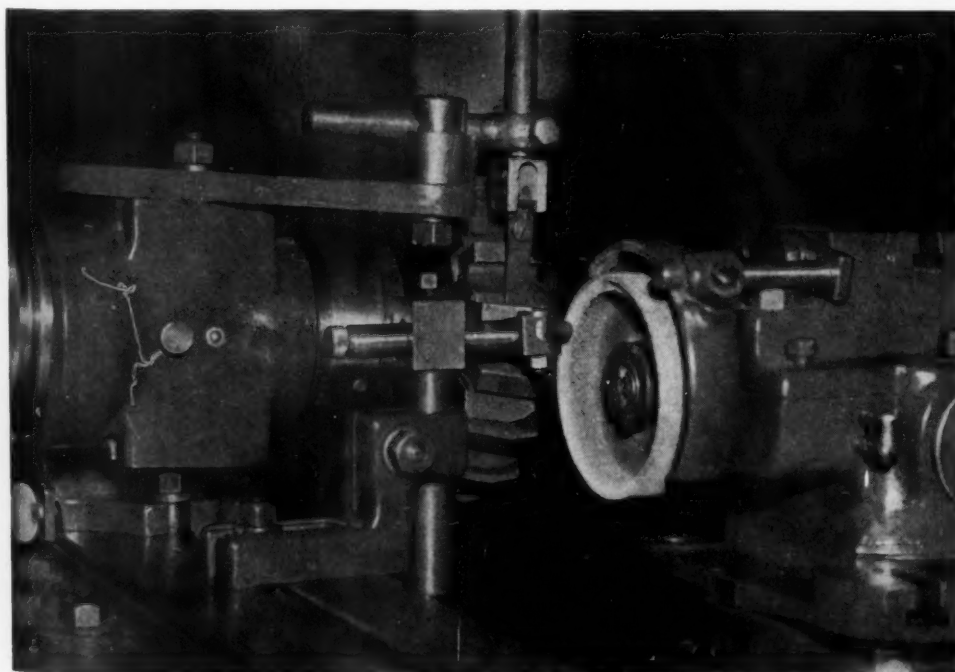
GRINDING THE FACE OF MILLING-CUTTER TEETH
